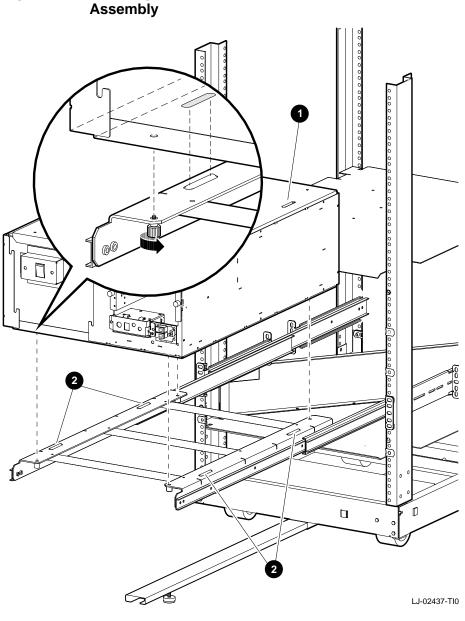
Securing the PE50A–B9/D9 Unit to the Chassis Slide Assembly
